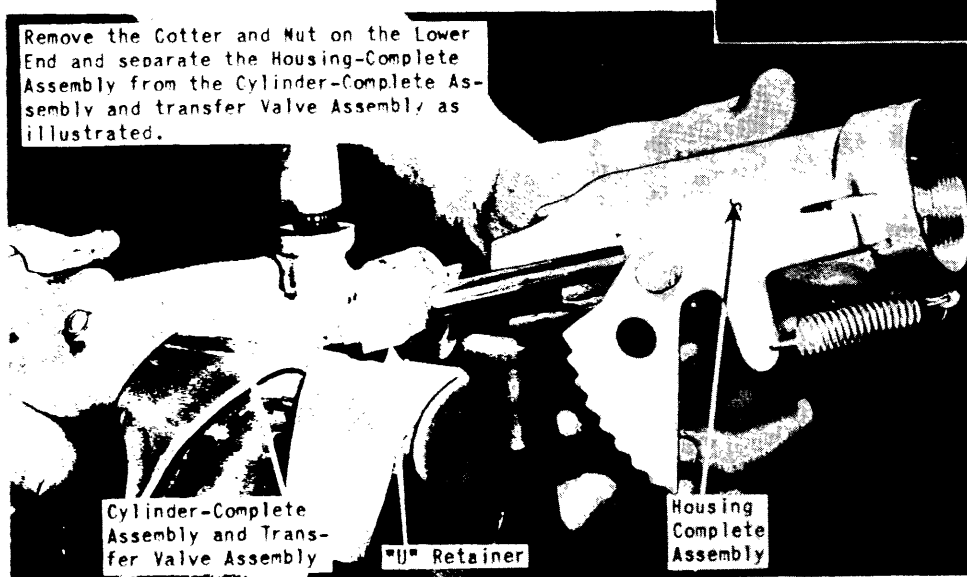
Removing Housing Assembly from Cylinder Assembly
